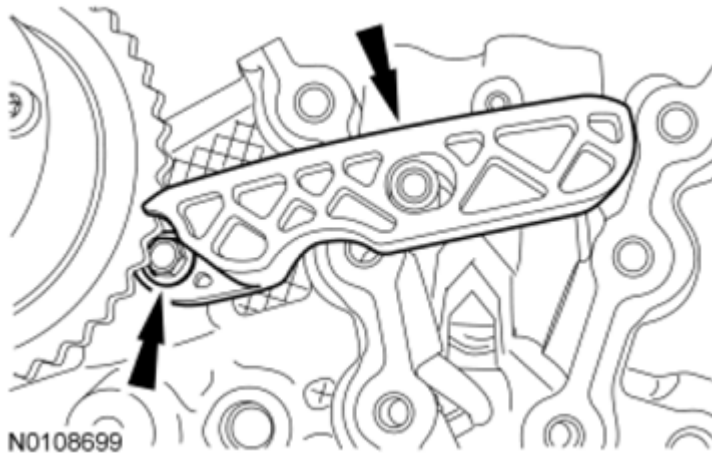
Locating RH Primary Timing Chain Guide And Upper Bolt
